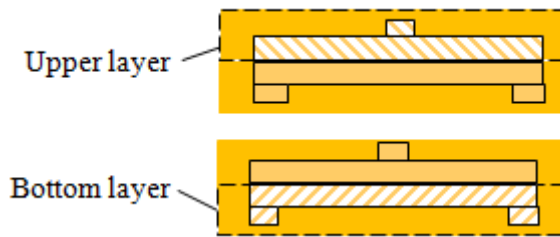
Upper and bottom layer of the nylon pieces that will be fabricated separately
